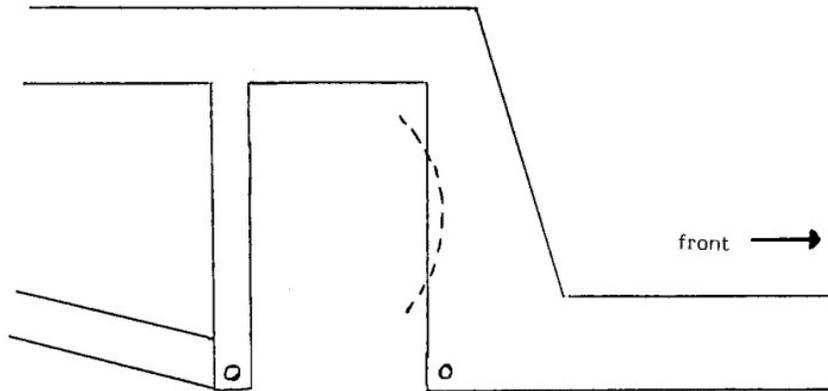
Illustrating chassis mod. necessary for UJ clearance.
